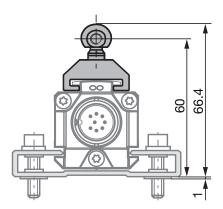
Dimensions and distances with BTL5-F-2814-1S magnet
